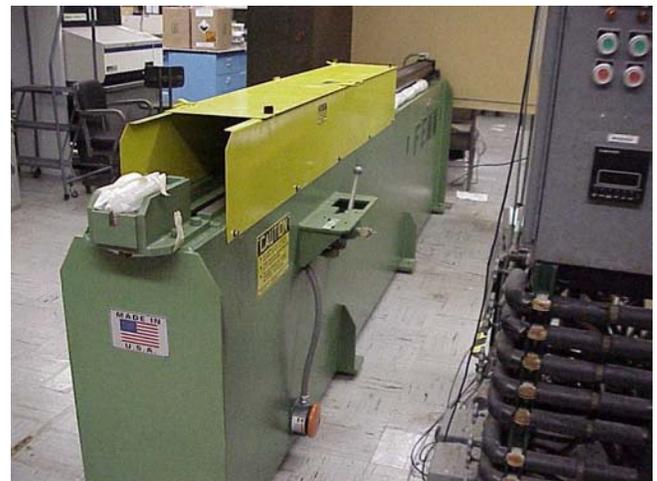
Photograph of the Laboratory-Scale Hydraulic Drawbench for Fabrication of (Th,U)O₂ Fuel Pins.
